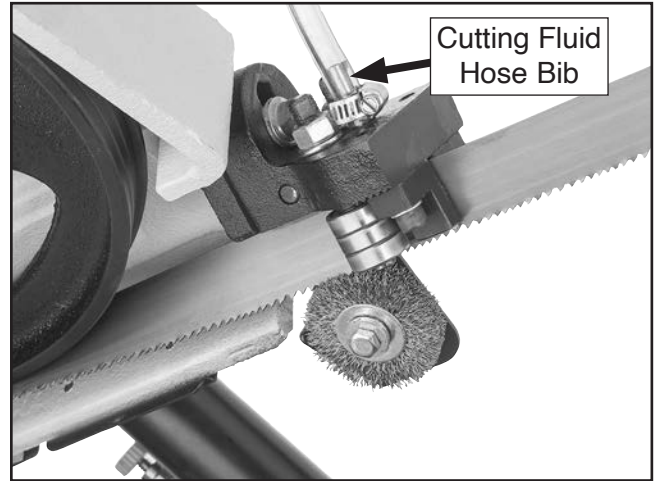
Location of cutting fluid hose bib (lower blade guide assembly shown).
